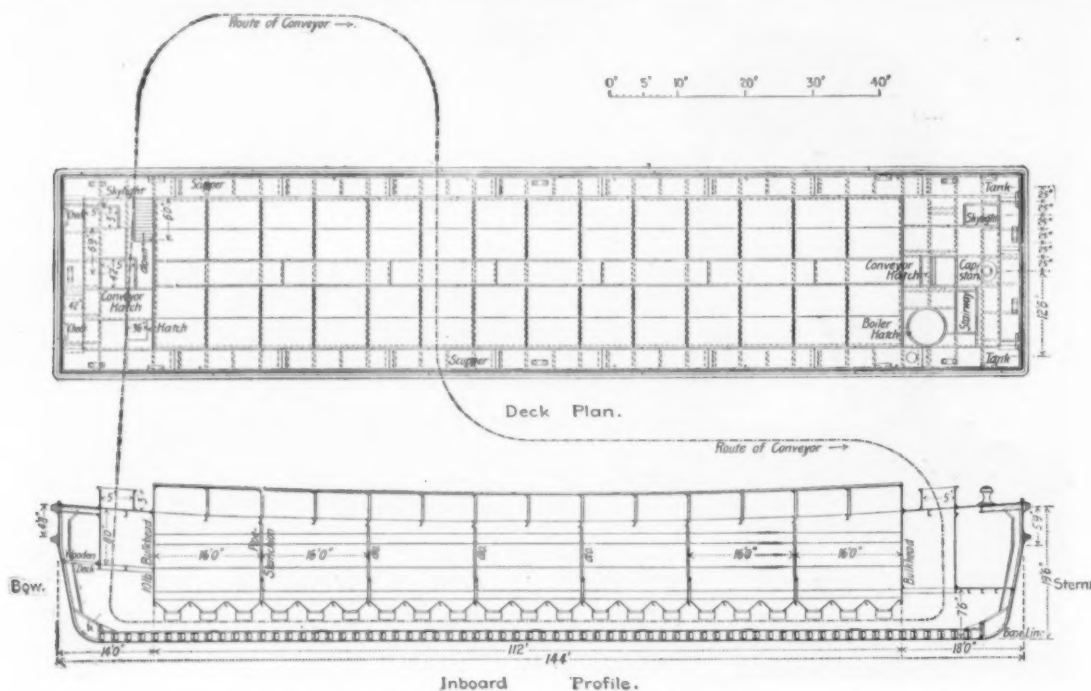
PLAN AND LONGITUDINAL VERTICAL SECTION.
